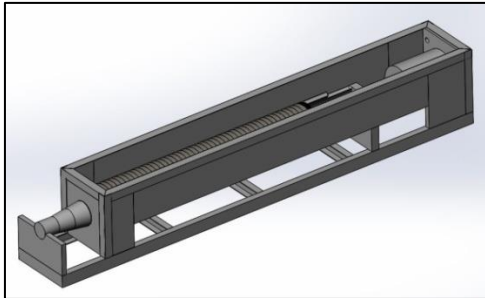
Isometric view of CAD model of Fiber disc press machine
